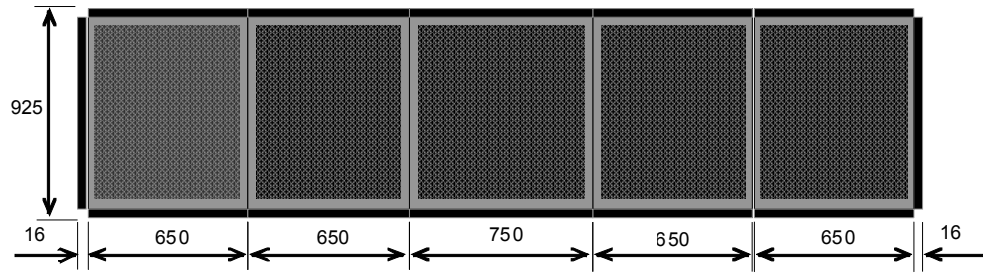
Physical Dimensions: Disk Controller Frame
